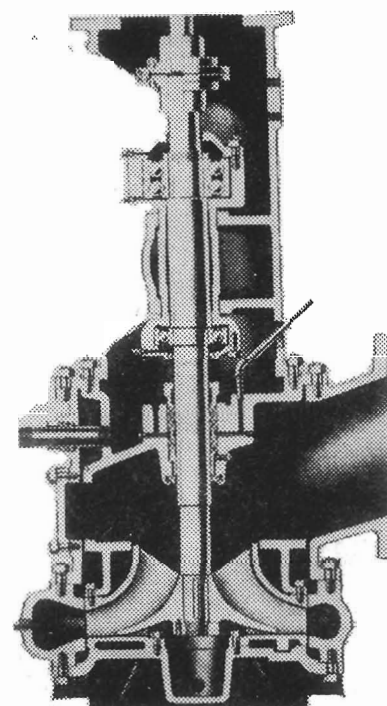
vertical centrifugal stock pump has open - type impeller.
